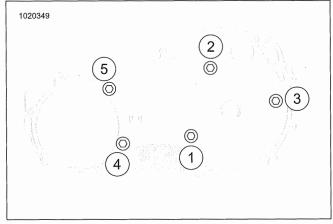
Sealing Screw Tightening Sequence MAINSHAFT BEARING AND SEAL
